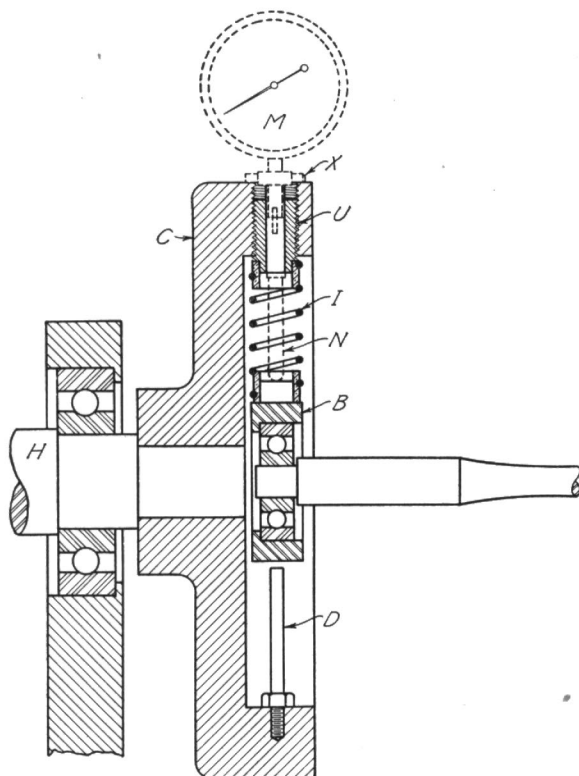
CROSS-SECTION OF HEAD OF ROTATING-SPRING FATIGUE TESTING MACHINE
